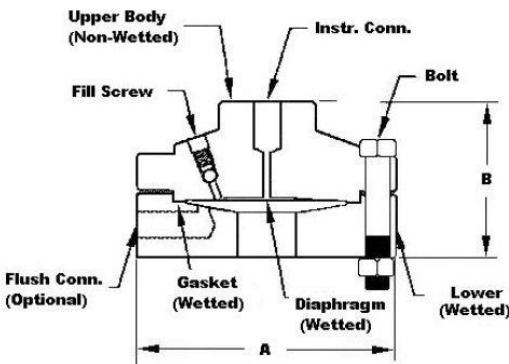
Seal Dimensions (Threaded Process Connection Seals)
